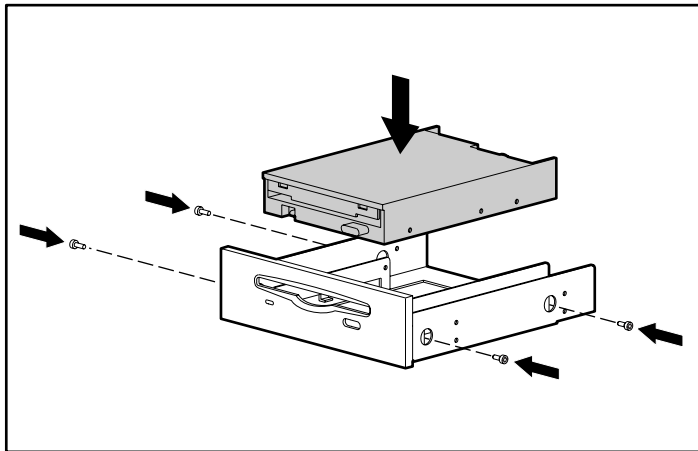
Attaching a 3.5-inch drive to the 5.25-inch bracket
